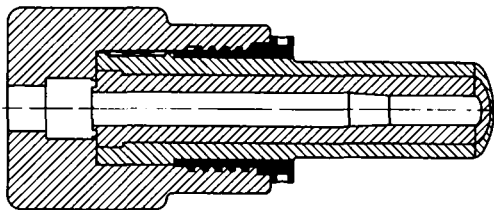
Breech ring fastening with tube flange and clamping screw.
